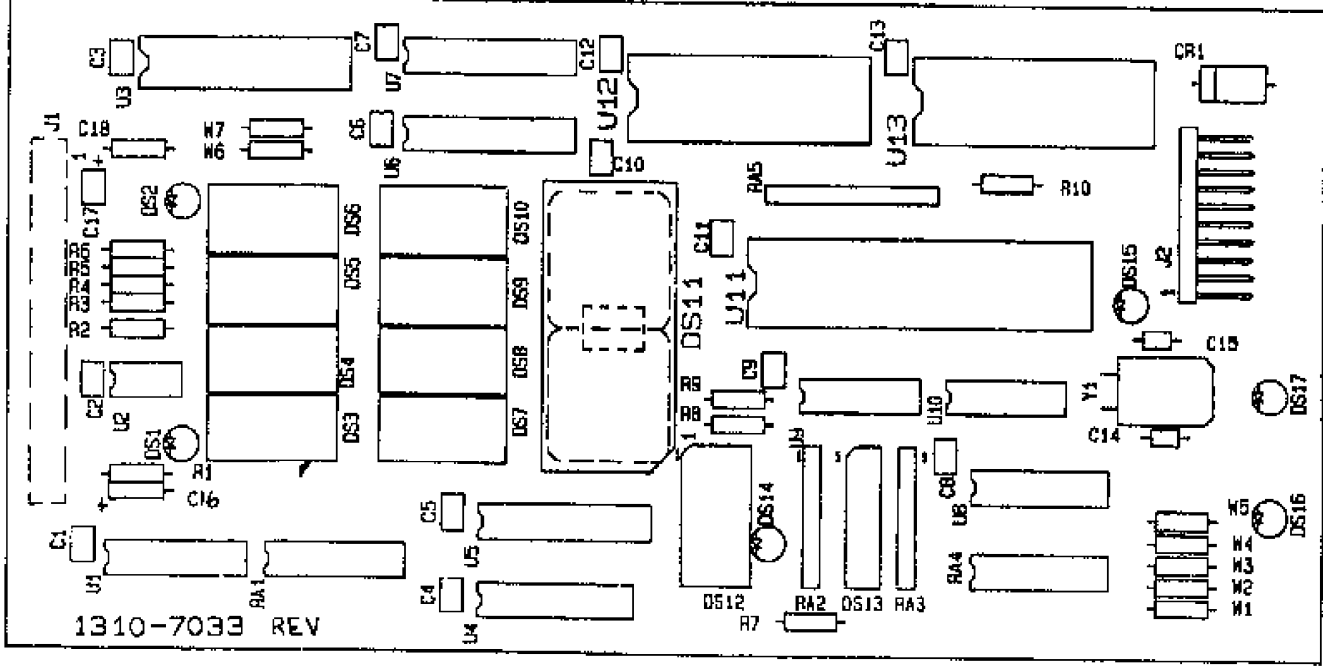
Parts Identification Display Circuit Card Assembly [v7.xx] PN 1310-7033-3
